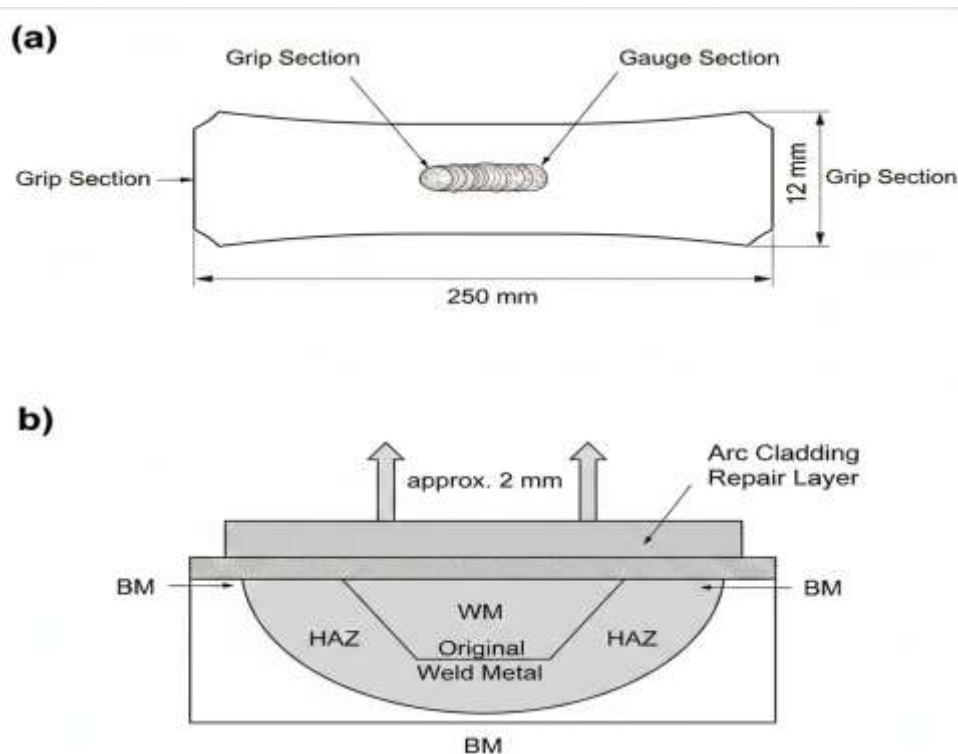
Geometry of the fatigue test specimen and schematic of the arc cladding repair. (a) Dimensions of the flat fatigue specimen machined from the welded EH690 plate, showing the grip sections and the reduced gauge section (thickness: 12 mm). (b) Cross-sectional schematic of the butt-welded joint illustrating the base metal (BM), original weld metal (WM), heat-affected zone (HAZ), and the applied arc cladding repair layer (thickness ~2 mm) deposited over the corroded region.
